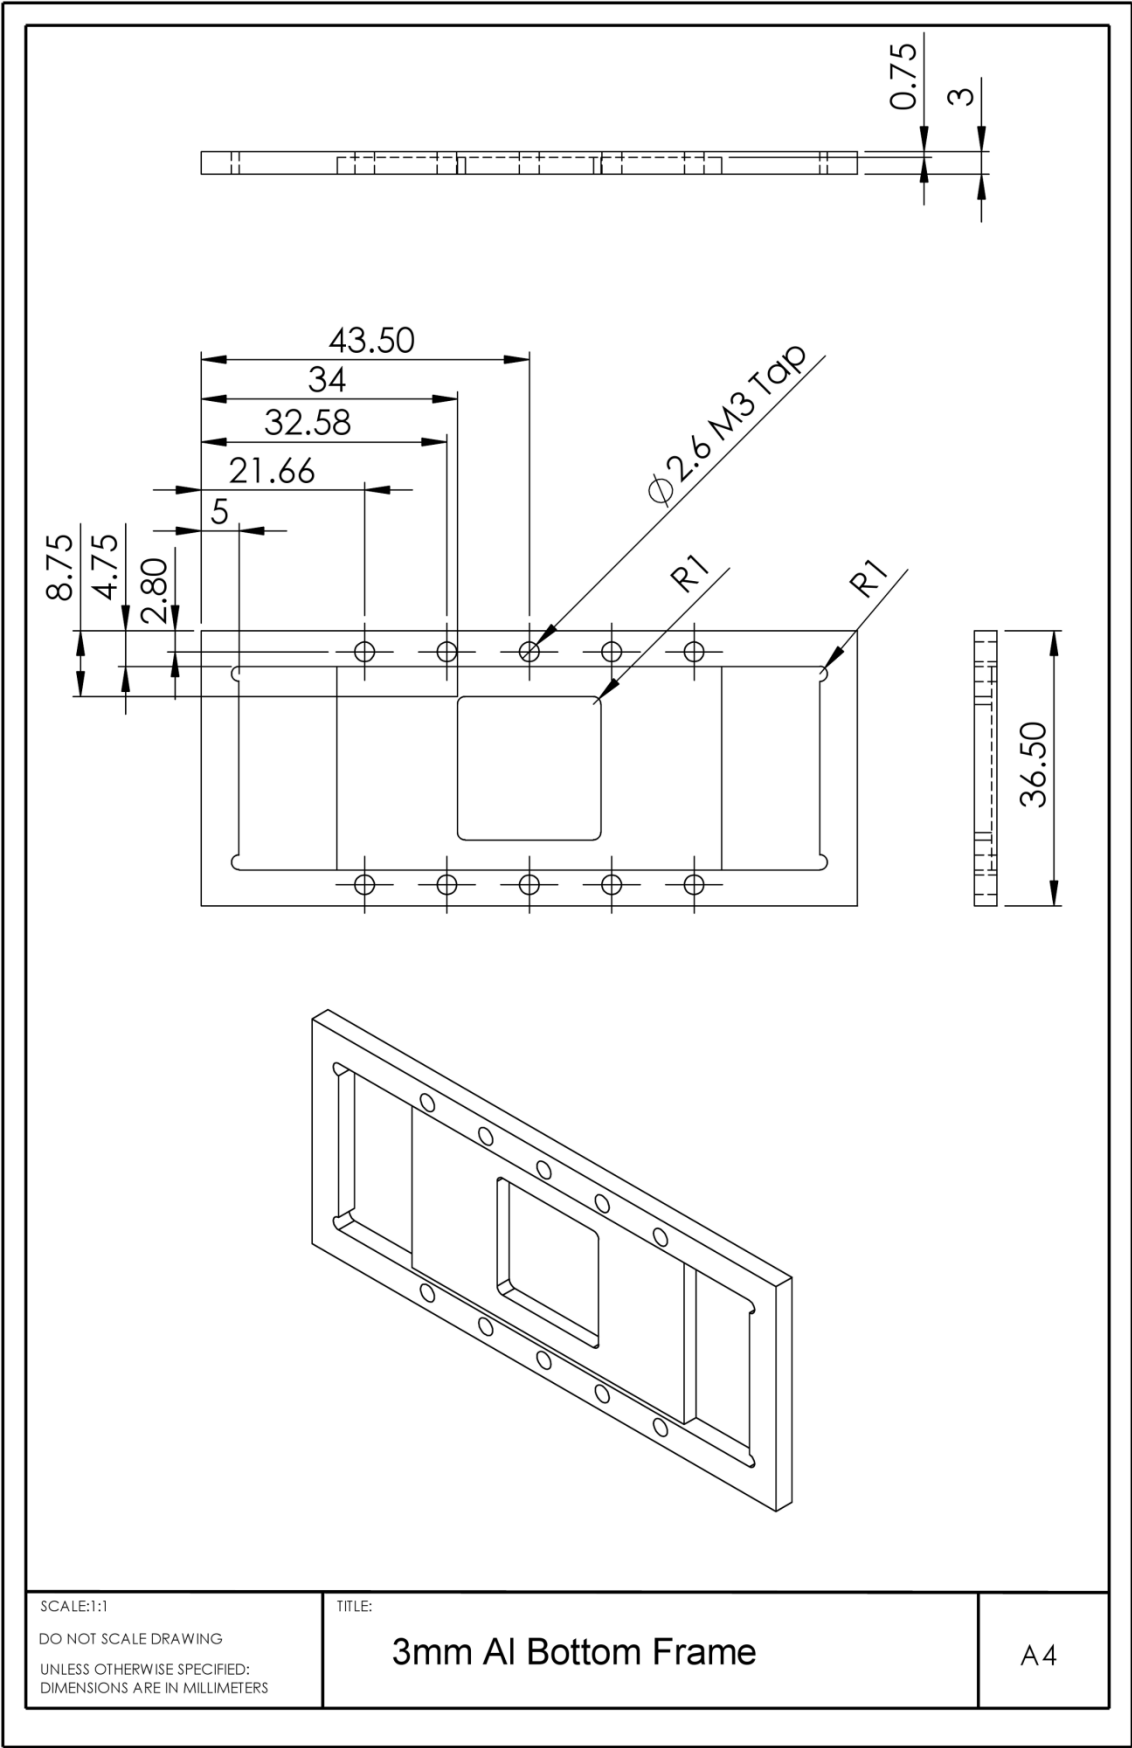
Technical drawing of aluminium version of prototype bottom frame.
